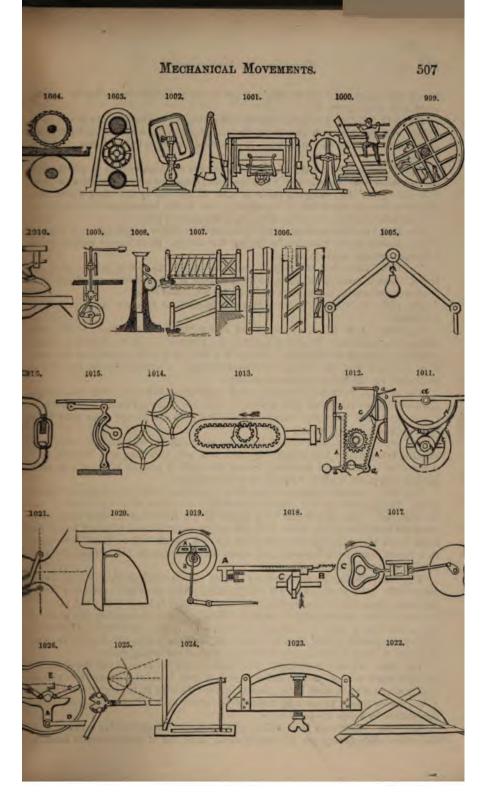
Jig-saw, the lower end connected with a crank which works it, and the
